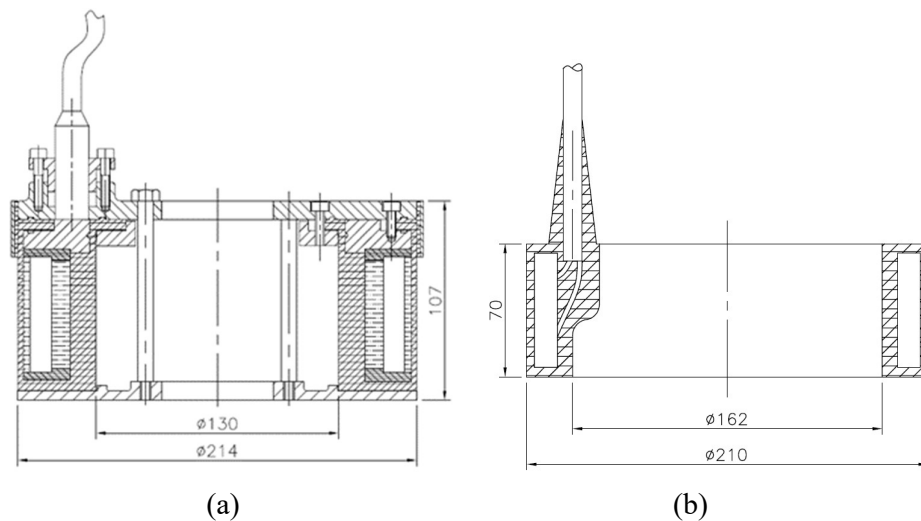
Schematic diagram of (a) oil filled transducer (b) PU moulded.
